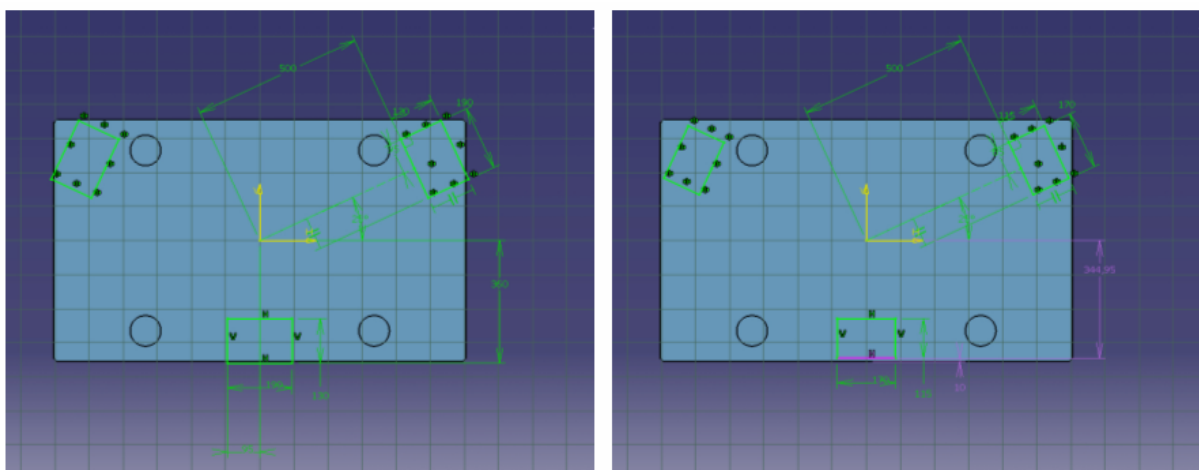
Location of the attachment components (shear keys) requires adaptation to the new outer dimensions (left Ref 1.0; right Ref.1.1); shear keys will be smaller in the new design.
